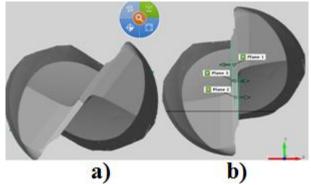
Aligning the tool on the centre of coordinate system a) Not alignment tool, b) alignment tool
